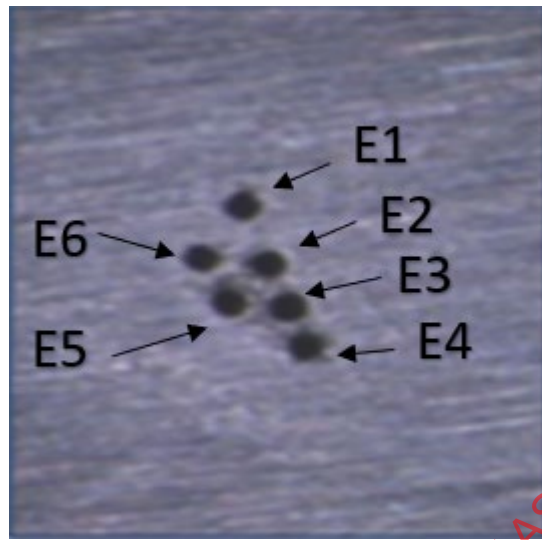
FMC/TFM 3D imaging of carbon steel bar with machined flaws
